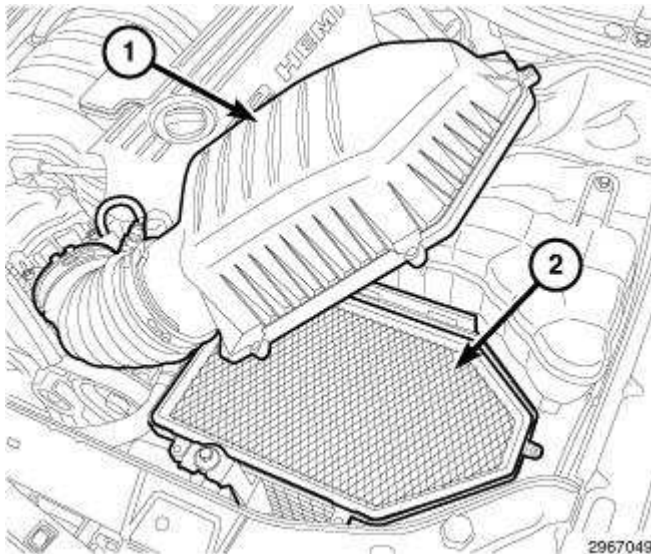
Air Cleaner Housing Cover & Air Cleaner Element
